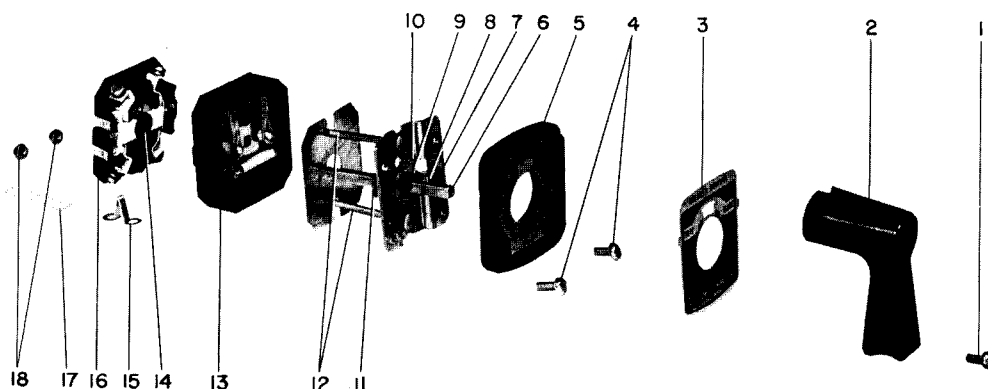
Exploded View of C77 Control Switch (Fixed Handle Type)
